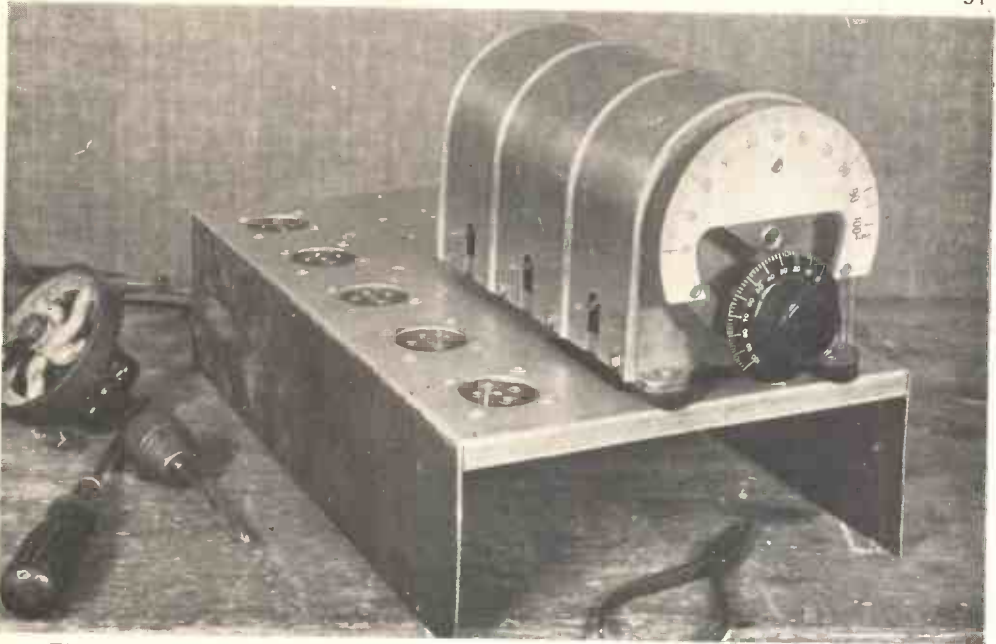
It is often necessary to mount the gang condenser on rubber washers.
